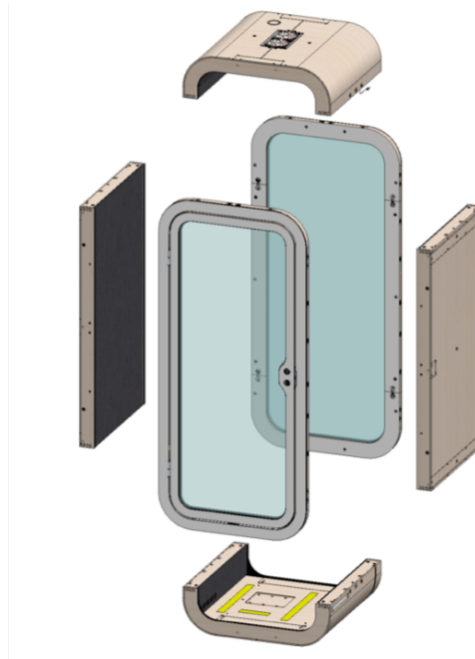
Exploded view of the model O without furniture, carpet or metal covers.
